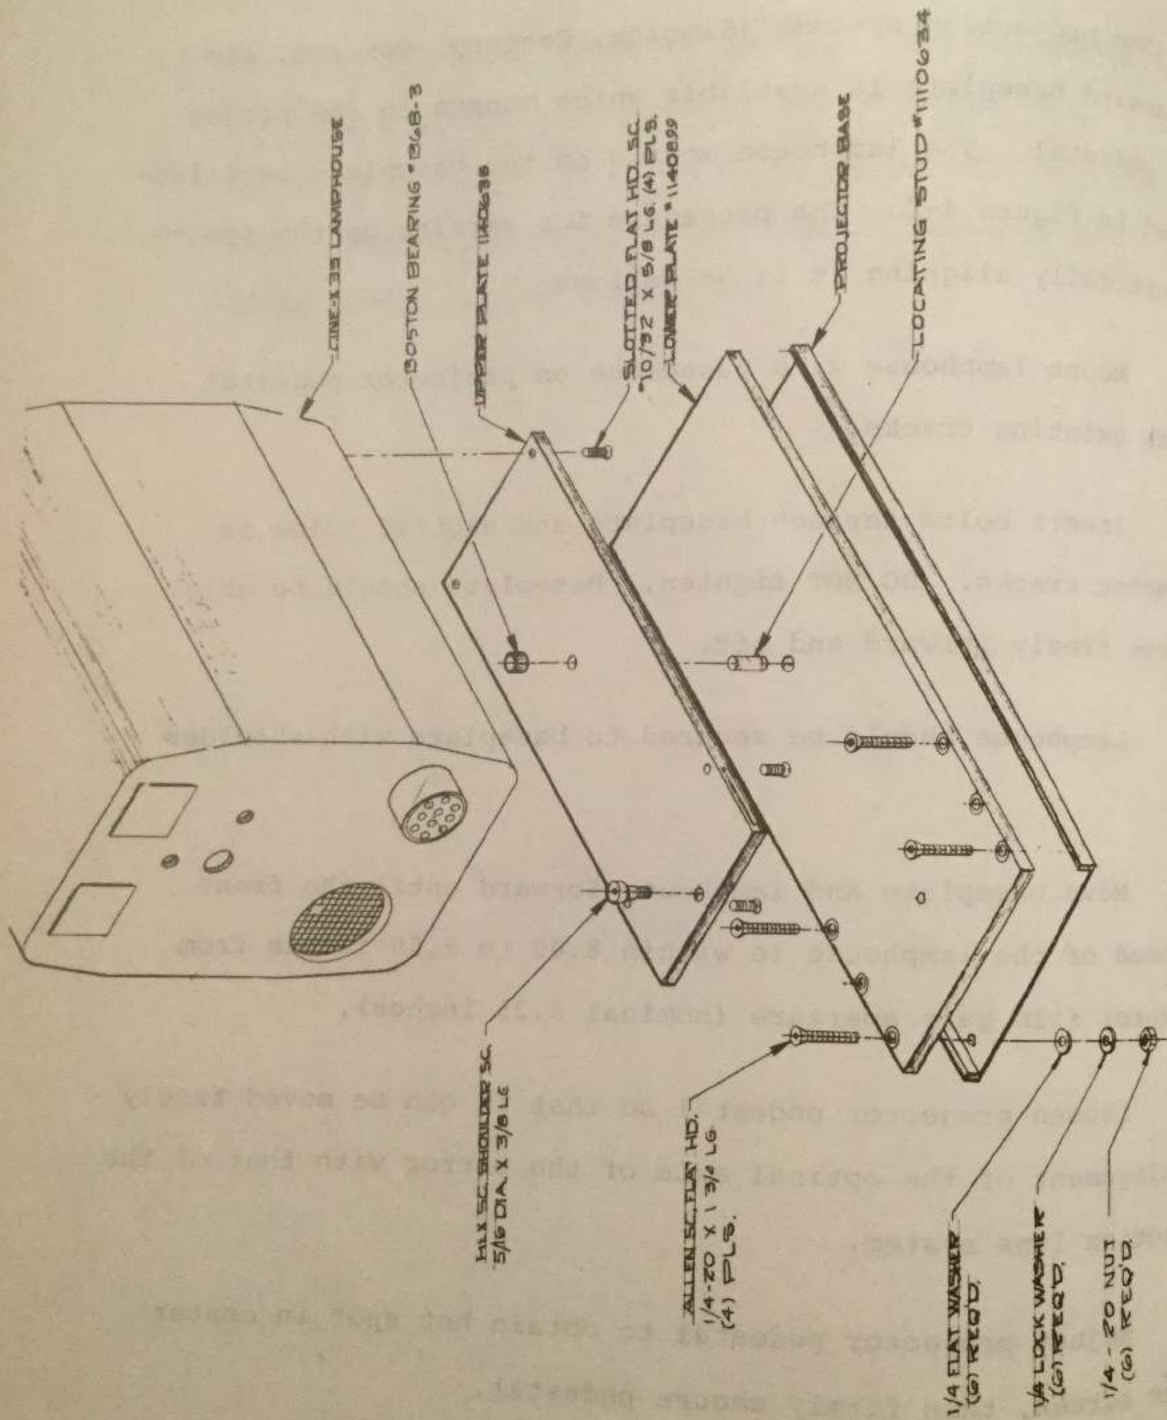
35mm Mounting Kit Swivel Assembly
